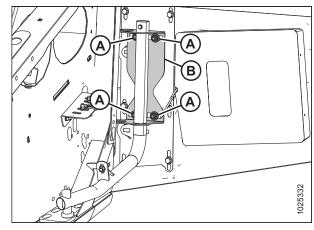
Left Endshield Support Tube on D1X Series Header
